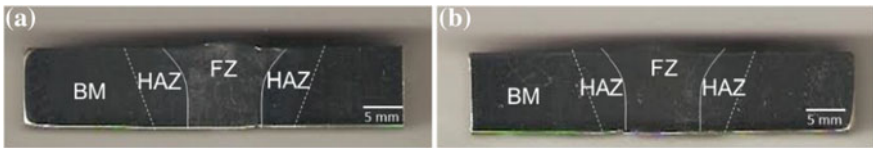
Gas tungsten arc welding profiles for an Inconel™ 718 alloy, a C1 (only one pass of welding), and b C2 (three welding passes)
